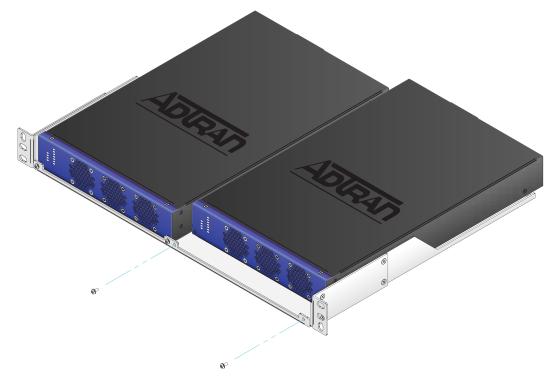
Rack Mounting the NetVanta 1131 Using the Dual Mounting Tray
